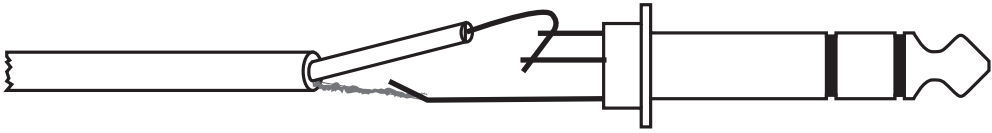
Hot lead of a single contact mike soldered to both the left and right connector tabs of a stereo plug.
